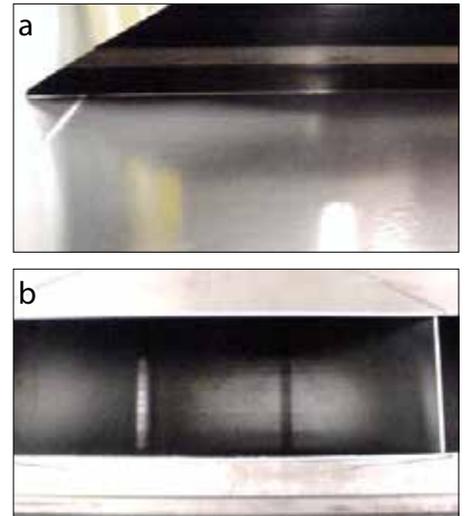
(a) Distortion of welded part after optimization; (b) Front view
